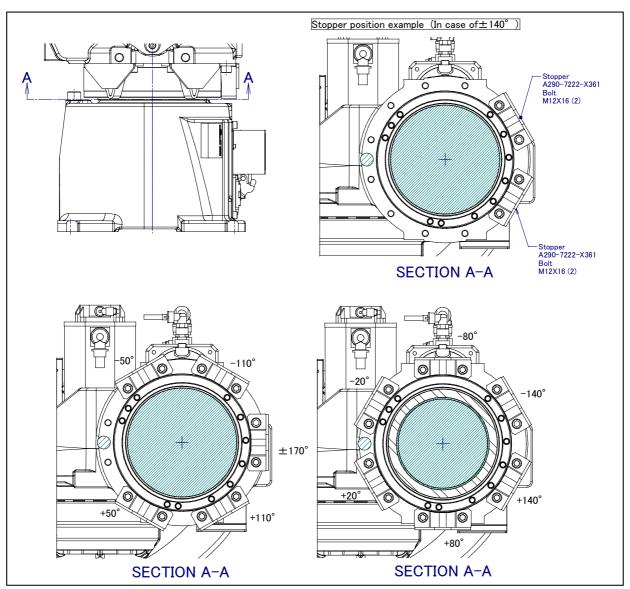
(b) Installing of J1-axis adjustable stopper
